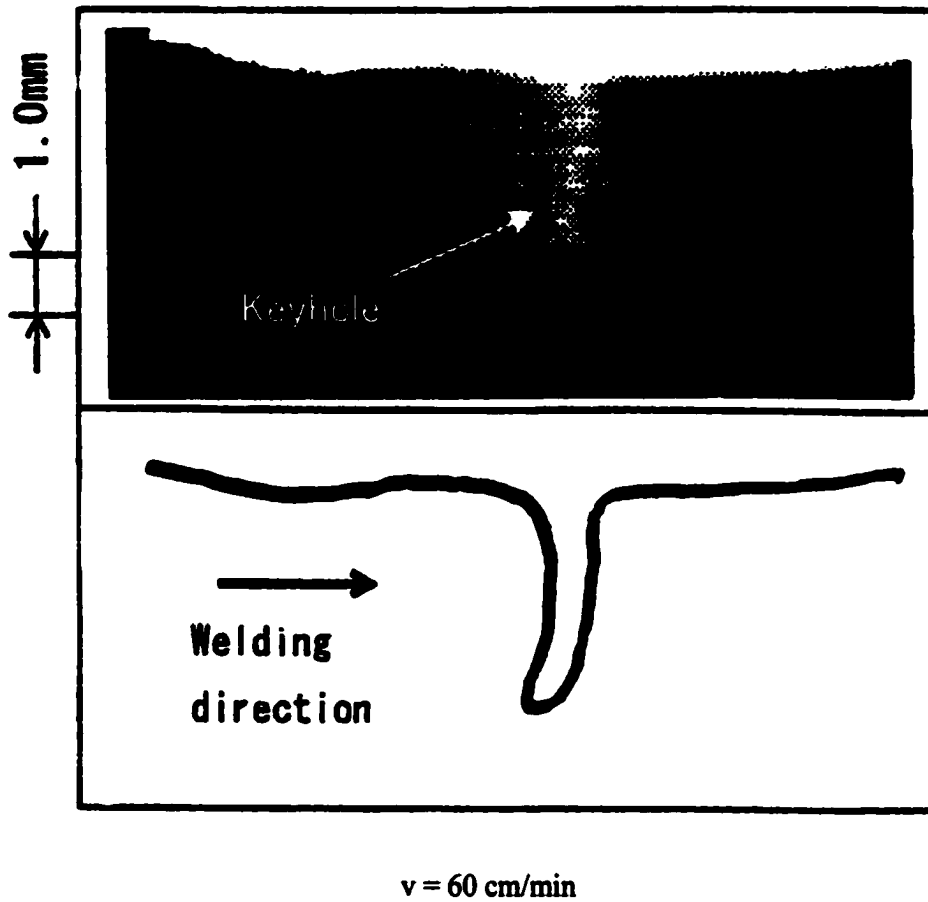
Typical keyhole shape for high speed pulsed Nd:YAG laser welding of stainless steel 304 observed using in situ X-ray transmission imaging system [45].
